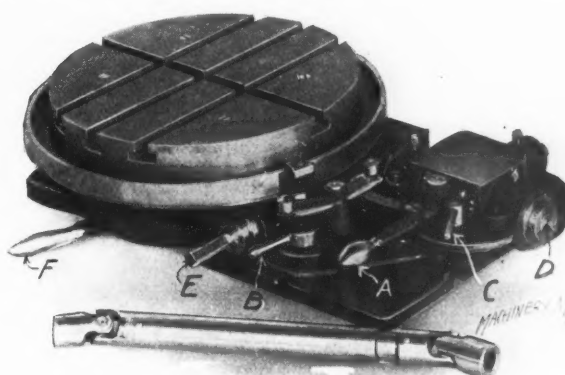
Rotary Milling Attachment Removed from Table, in order to show Details
